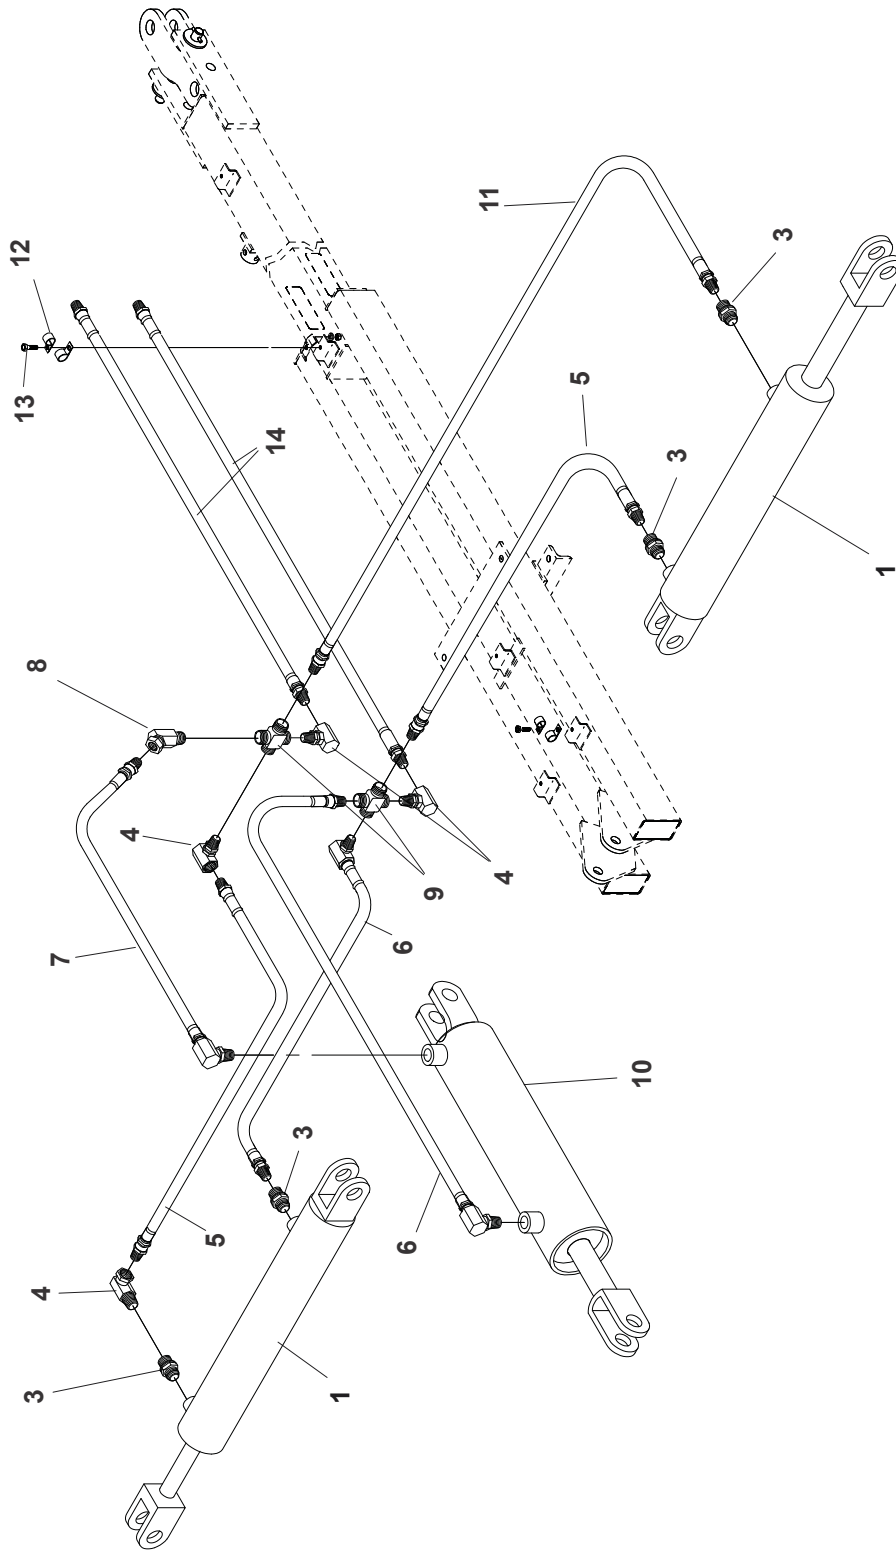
Hydraulic Layout, O-Ring Ports and JIC Hoses - After 11/15/2003
